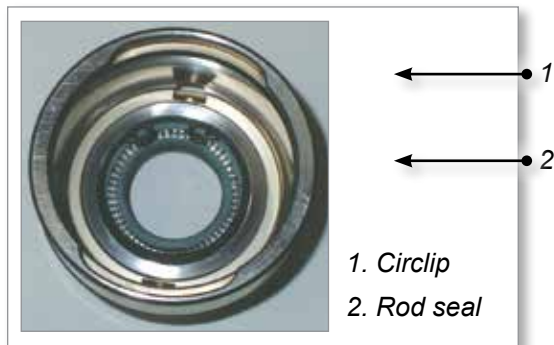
6X00 Series and 7100 Series bottom cylinder
